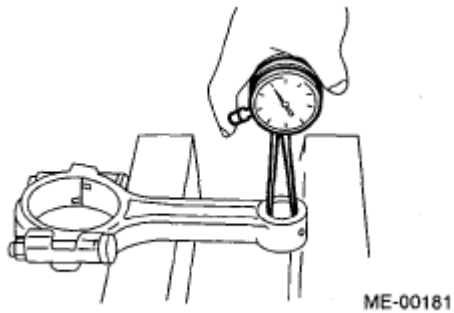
Measuring Connecting Rod Small End Bushing Diameter
